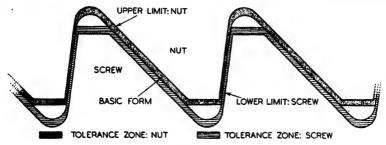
THREAD TOLERANCE ZONES-BUTTRESS THREAD
